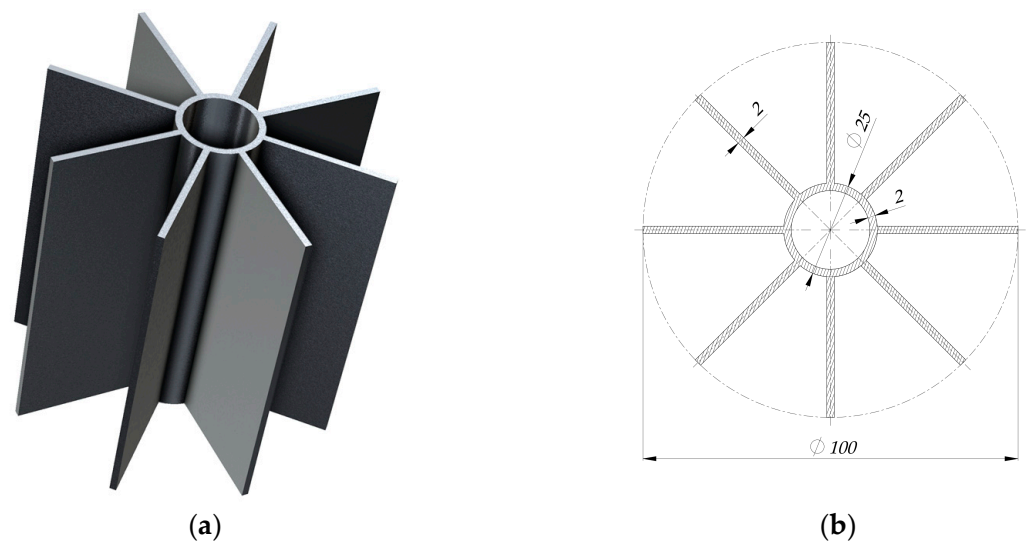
(a) Geometry and (b) cross-sectional dimensions of longitudinal finned tube with 8 fins.
